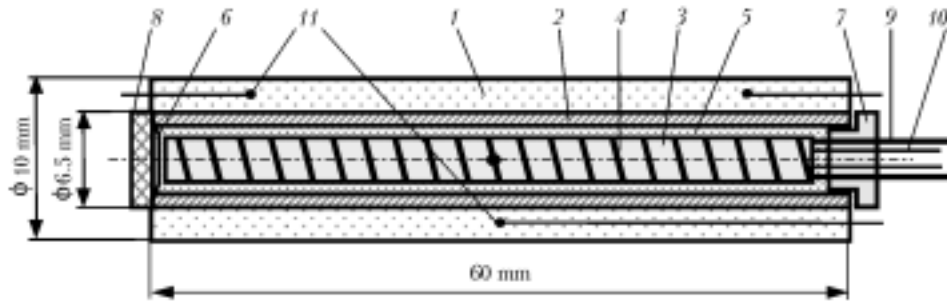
Design of the investigated cylinder: 1) body of a cylinder (copper sleeve); 2) steel body; 3) ceramic core; 4) resistance wire; 5) insulation material; 6) steel bottom; 7) ceramic insulator; 8) insulation sleeve; 9) electric sockets; 10) inner thermocouple; 11) temperature sensors.
